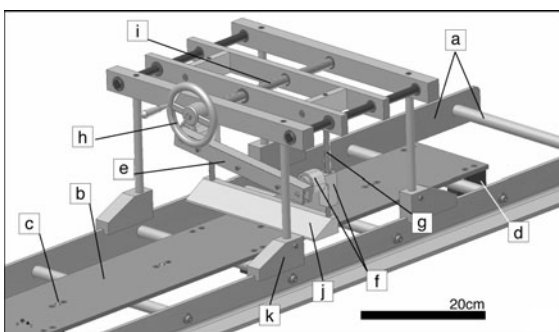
CAD image of cutter assembly attached to table assembly of the freeze core sledge microtome. Parts of the microtome: metal ramp (a), plastic cutting board (b), brass spike (c), plastic clip (d), knife holder (e), pivot (f), rod (g), crank wheel (h), bolt (i), metal foot (j), sediment cutter foot (k)
